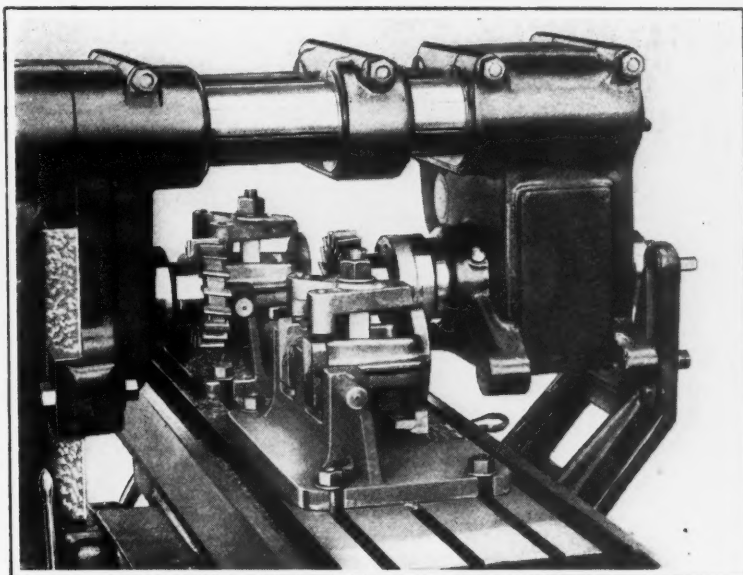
Milling Two Sides of Cast-iron Gate Valve Bodies by the Use of Two Fixtures
